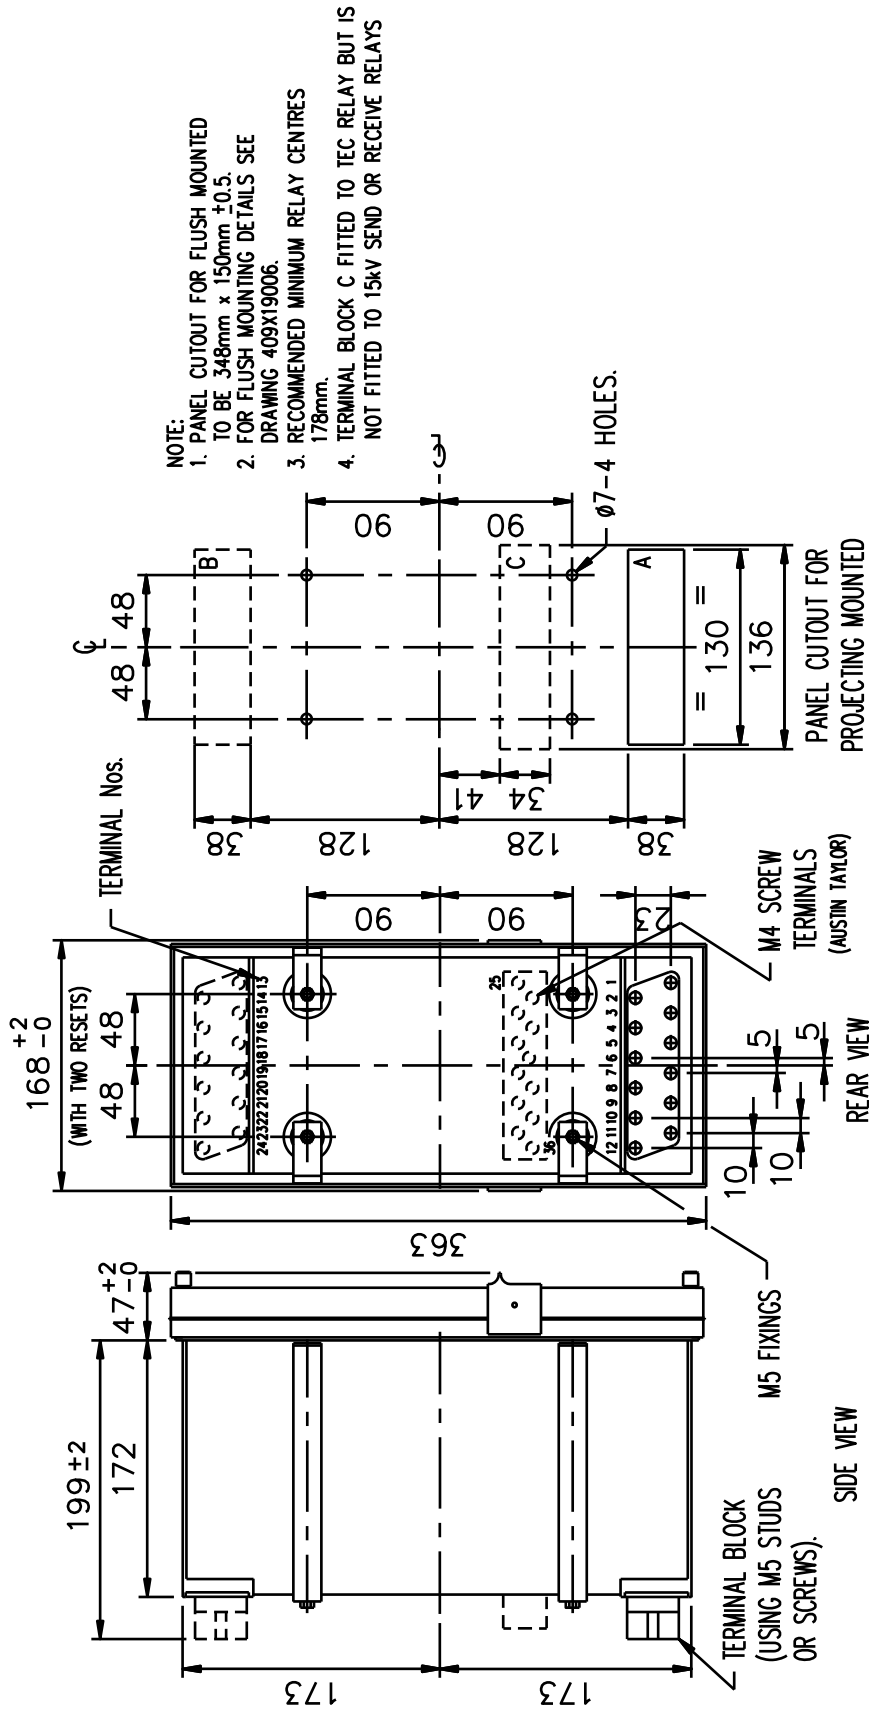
15kV Transformer Outline & Mounting Arrangement
